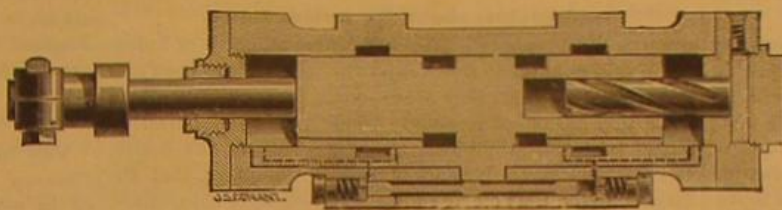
LONGITUDINAL SECTION OF ROCK DRILL.
